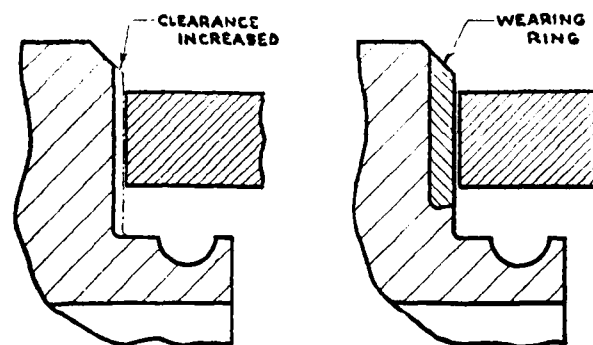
Methods of minimizing danger of heat checking on ends of backup sleeve. Left, more clearance is provided between bearing housing and sleeve. Right, wear ring is assembled to absorb possible damage and protect the sleeve.
